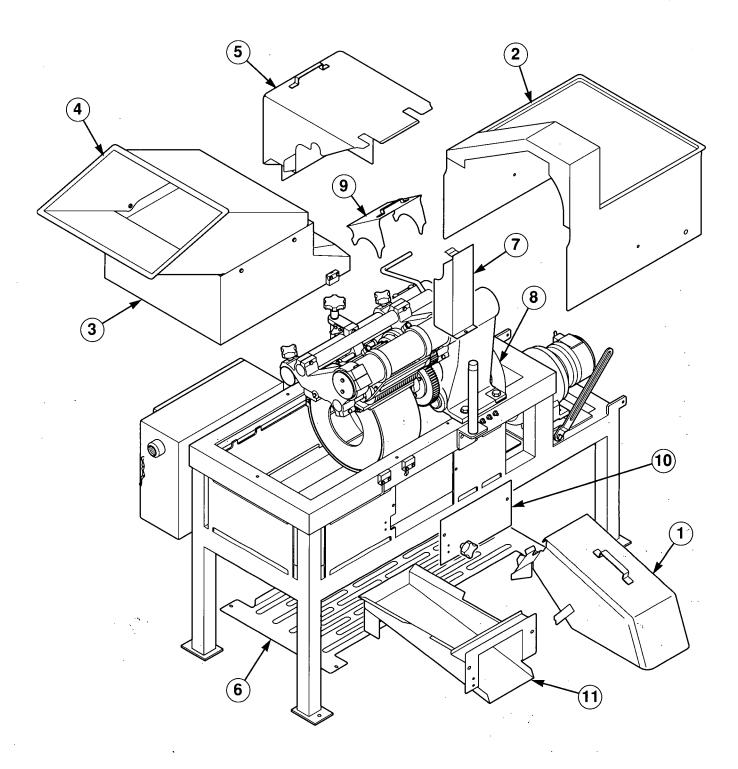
Covers and guards. (1) Discharge Chute, (2) Motor Cover, (3) Feed Hopper, (4) Feed Hopper Extension, (5) Chip Chute Enclosure, (6) Bottom Grid, (7) Gear Guard, (8) Drive Guard, (9) Shield, (10) Side Cover, (11) Juice Chute (alternate part, replaces side cover).
